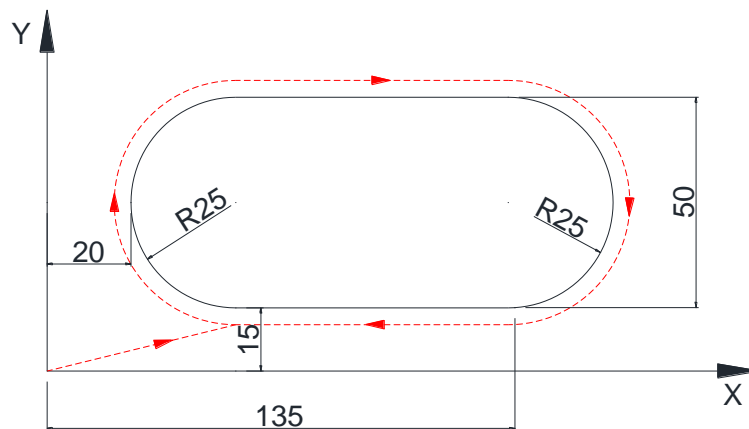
Sketch 2 of Workpiece Machining Process
